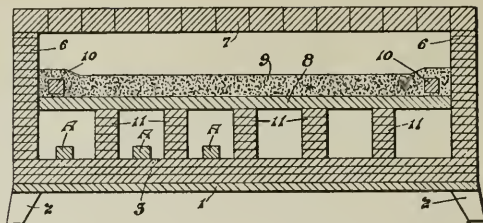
LONGITUDINAL SECTION OF FURNACE
